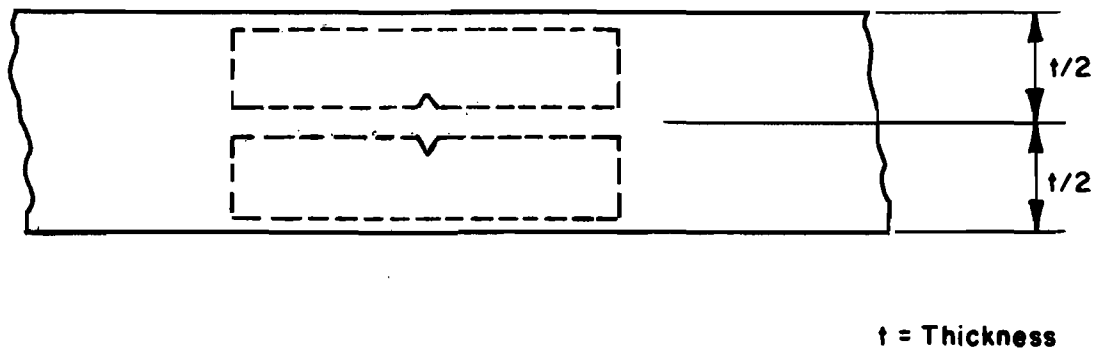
B. Sketch showing orientation of the Charpy impact specimens taken from the weld.
